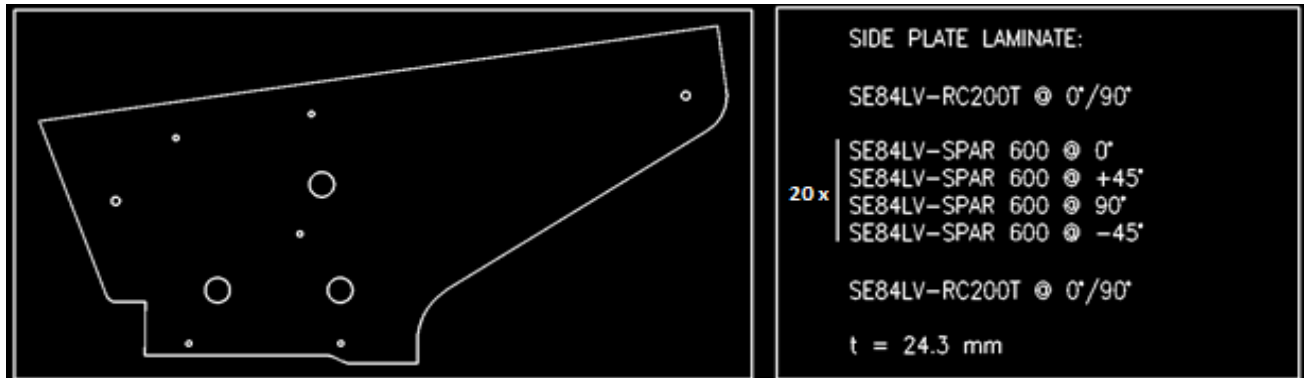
Laminating Instructions for The Masthead Side Plate Manufacture
